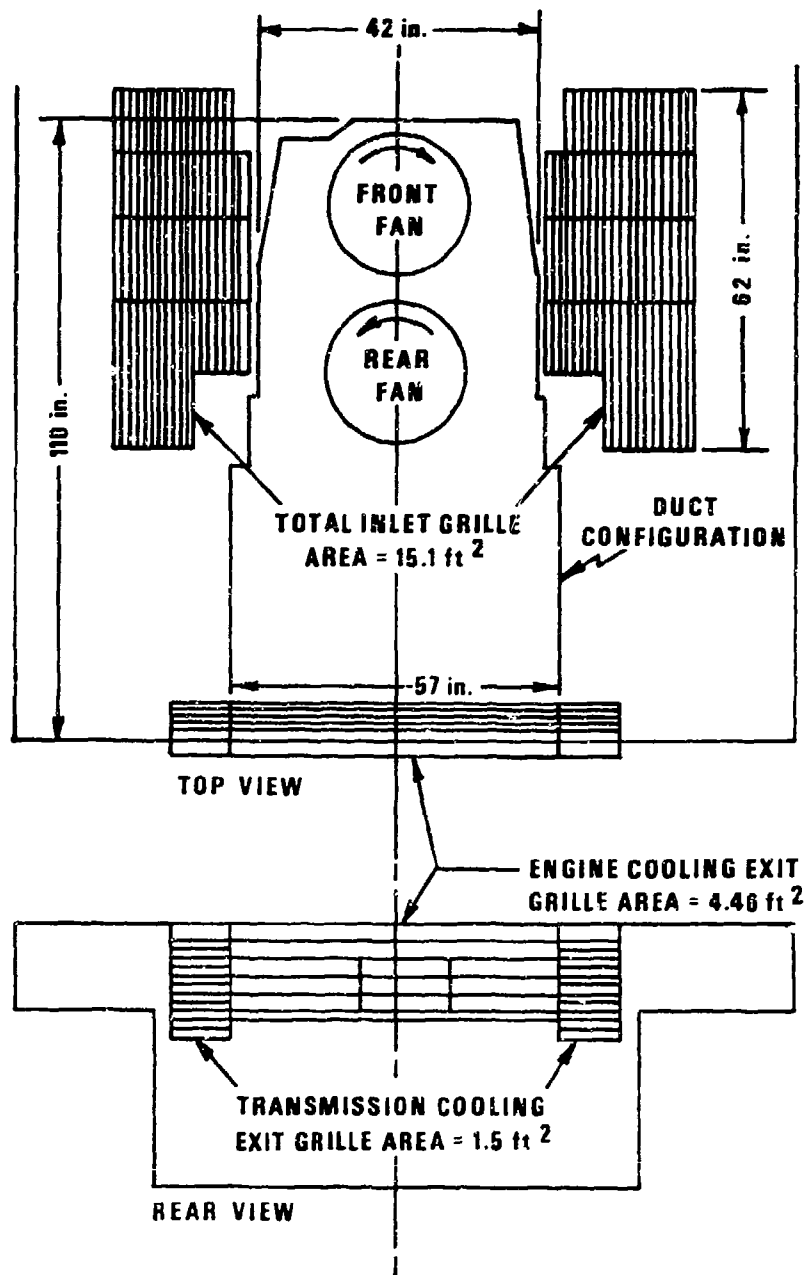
XM803 Experimental Tank Inlet and Exhaust Grille Configuration (Ref. 8)
